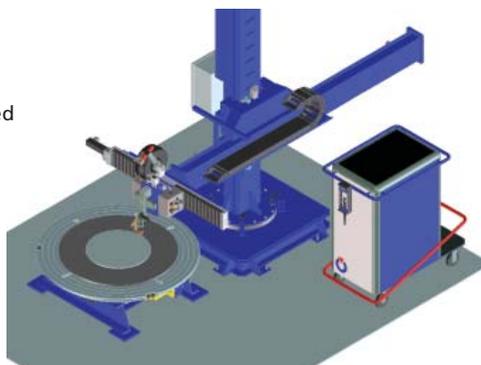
3D view of an installation designed for cladding fixed workpieces in the flat position
